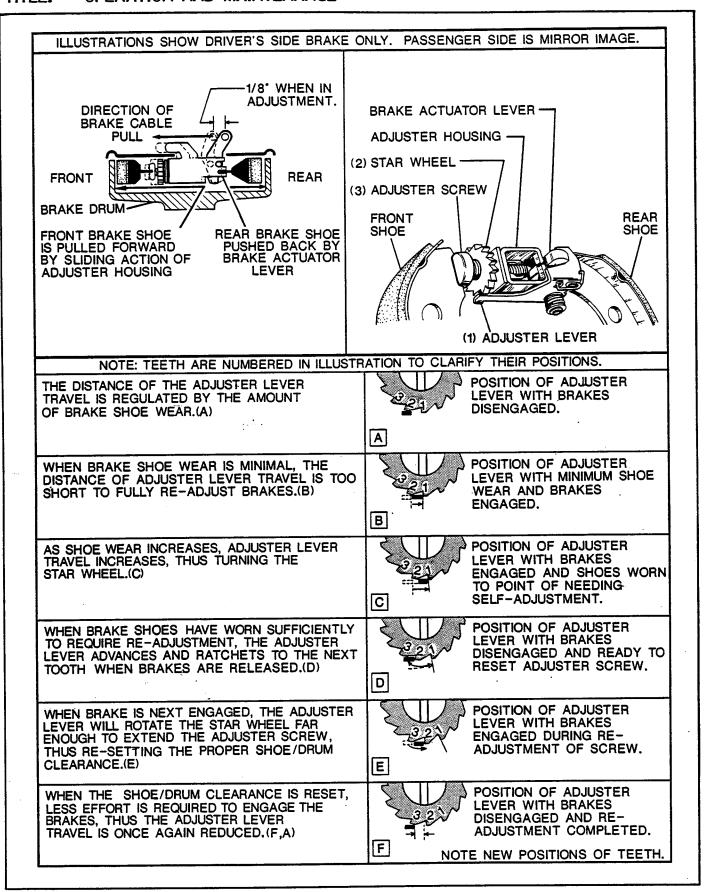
HOW THE BRAKE ADJUSTER WORKS
